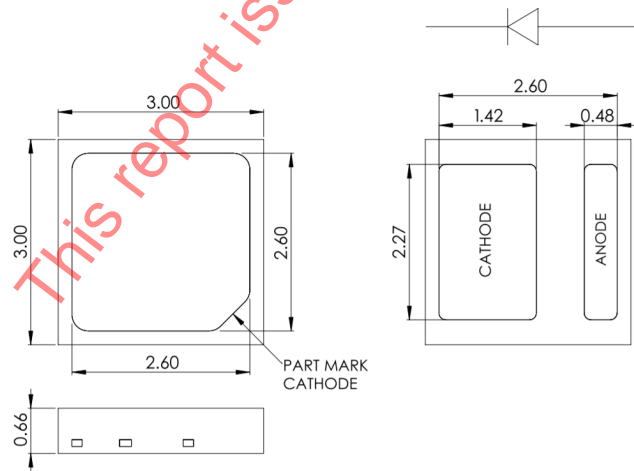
Mechanical Drawing for LUXEON 3030 2D Square LES. All dimensions are in millimeters.
